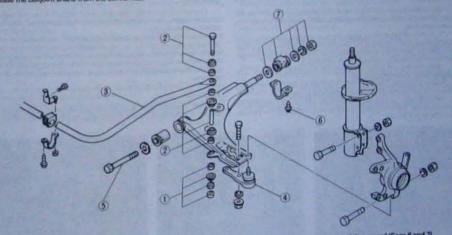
Exploded view of front suspension lower arm and associated components - September 1985 models onward (Seca 6 and 7)
